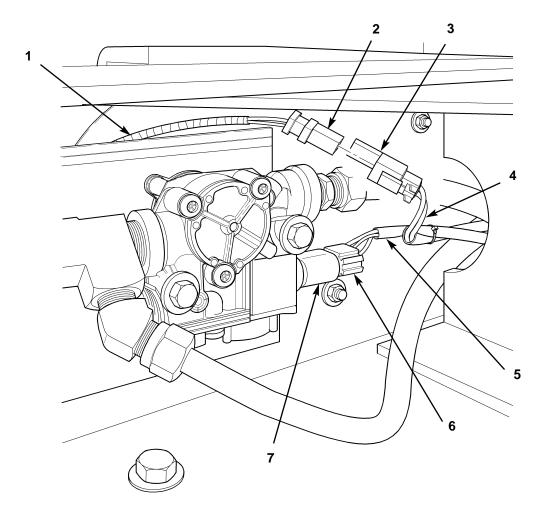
Connecting Harness Leads to Wheel Sensor Cable and Modulator.
